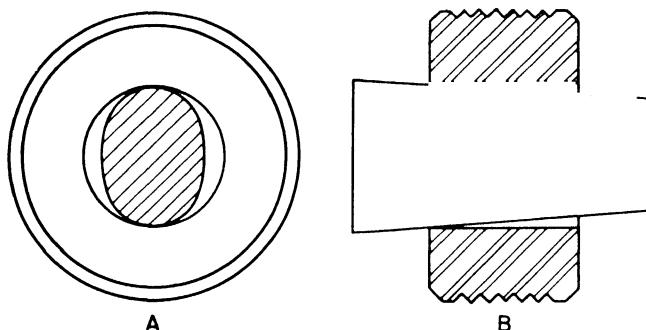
(A) Ovality in the shape of a work-piece cannot be detected by a ring gage. (B) Excessive taper in a work-piece can be detected by a ring gage.
